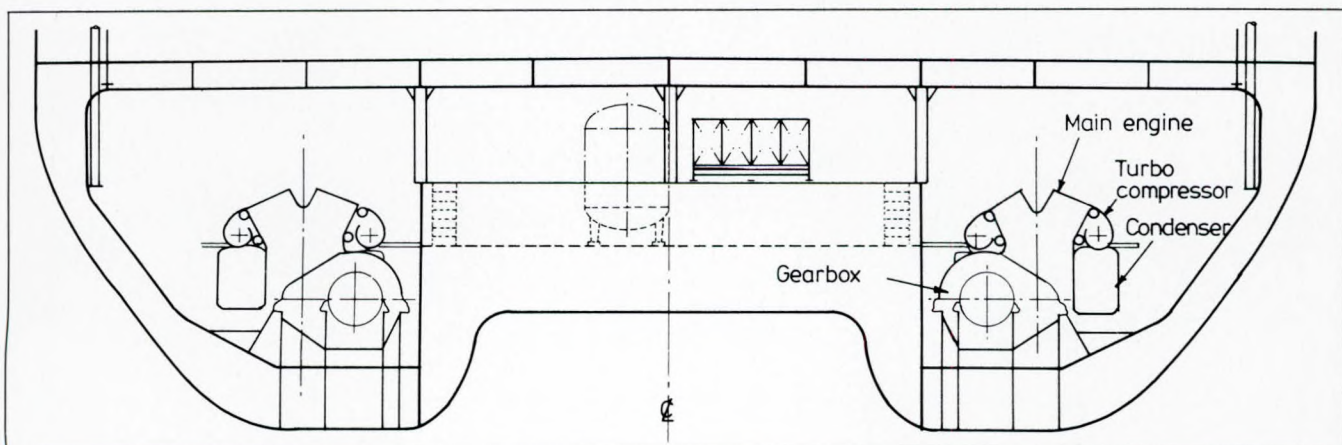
Section showing main engines and gearboxes in twin skeg aft-body
